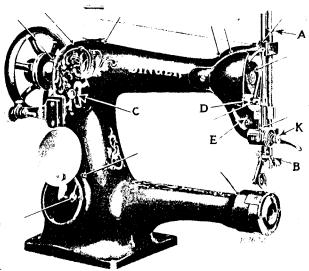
Ohang Points at the Front of the Machine Also Adjustments on the Machine
